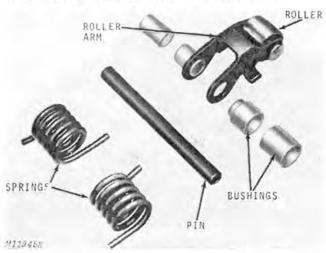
Inspecting Springs, Roller Arms, and Pins
